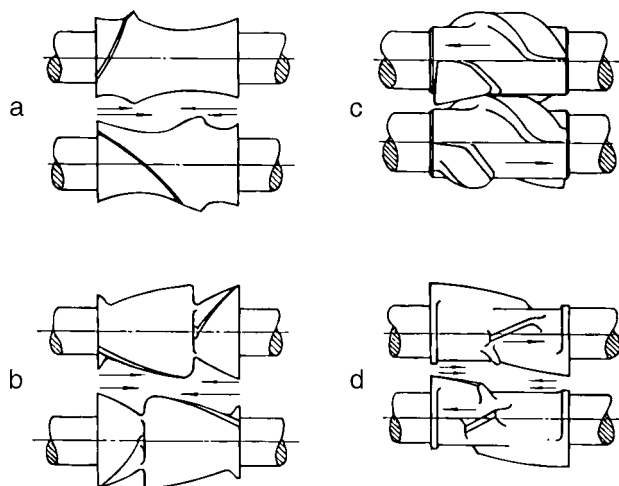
Examples of rotor designs (arrows indicate pumping action of wings).
